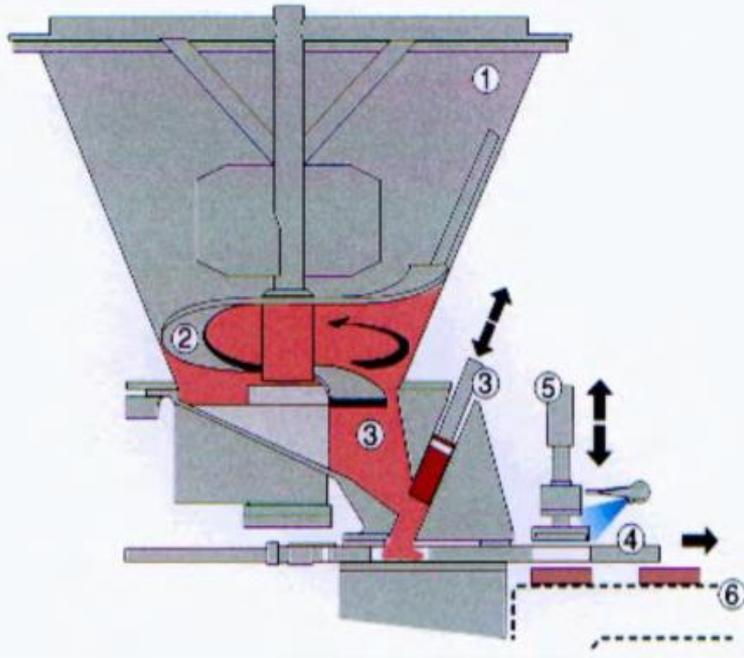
High pressure forming machine equipment used to produce nuggets and patties. 1. The hopper; 2. Coil-shaped screw; 3. The pressing block; 4. The form plate; 5. The ejectors; 6. The discharge conveyor. Courtesy of Marel.
